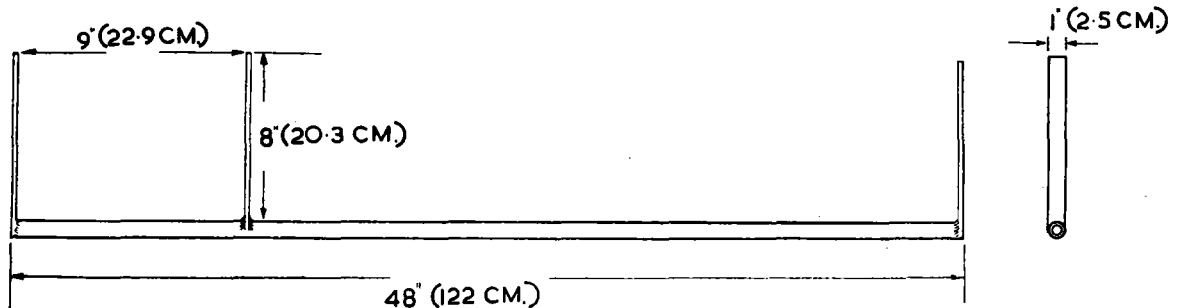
Jig for checking the alignment of the front and rear propeller shafts.
